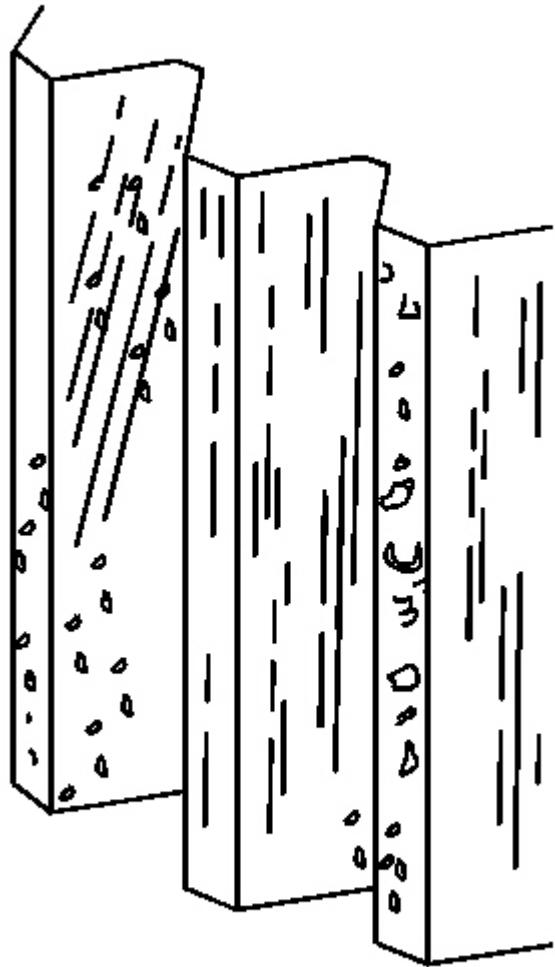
View Of Break-in-Wear Or Running-In-Wear On Gears
